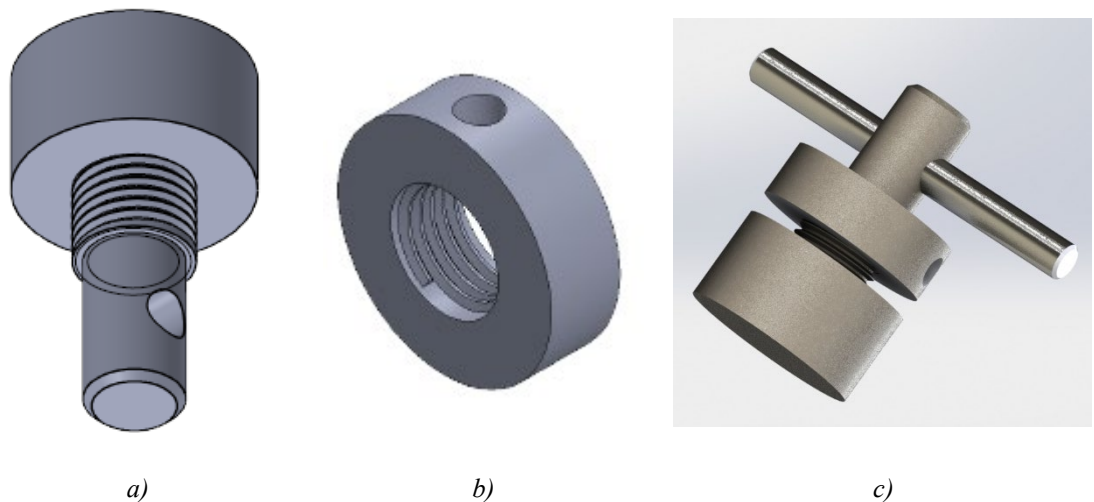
Illustration of the 2 kN platens; a) technical drawing of the platen; b) technical drawing of the locking nut; c) Rendered image of the platens and locking nut assembly with the pin that holds the platen to the load cell.
